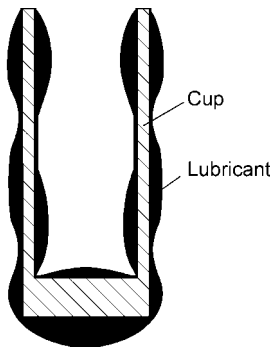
Lubricating layer profile on a cup after cold extrusion.
